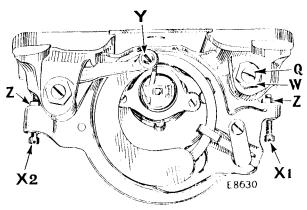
Adjustment for Raising and Lowering the Feed Wheel (Machine 31-18)
